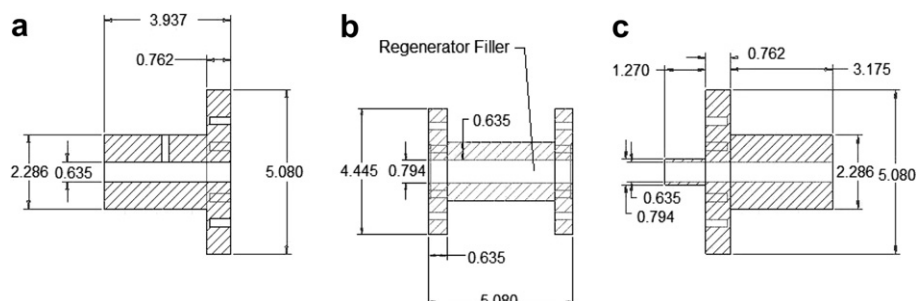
Detailed test section of the axial test apparatus (dimensions in cm).
